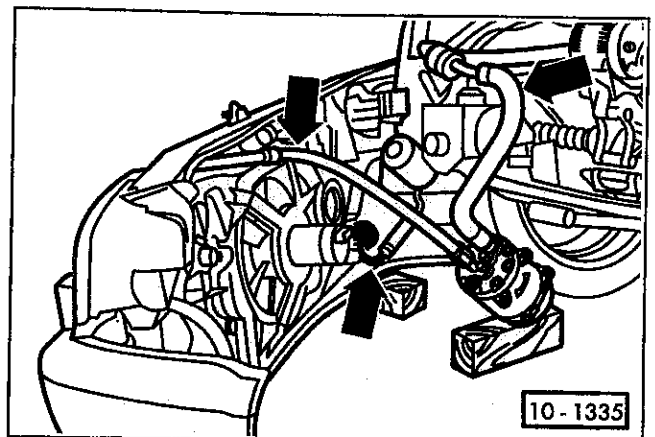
A/C compressor shown removed from engine and supported. Do not stress or kink refrigerant lines (arrows).
